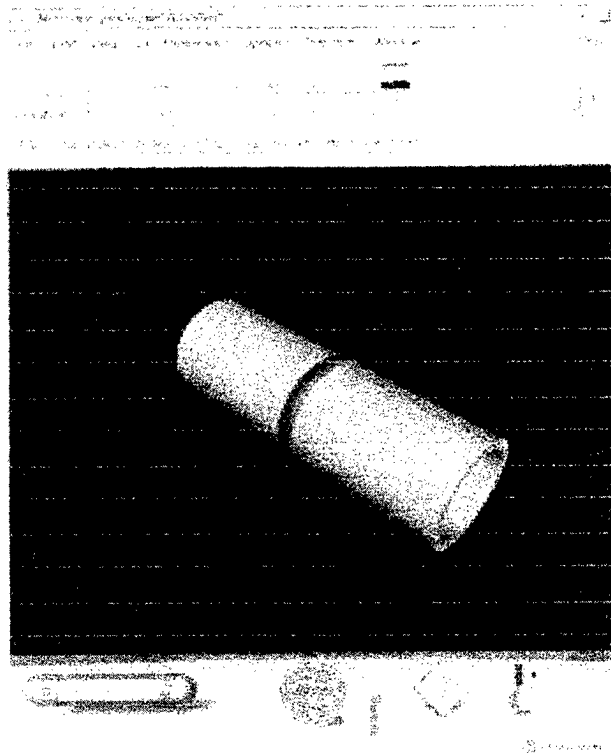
Two pieces of silicon - carbide tube joined by SALD. View on the WWW.
